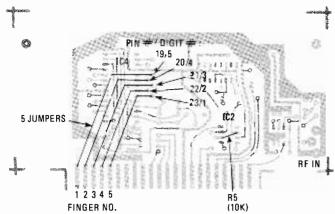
JUMPERS ARE NEEDED to complete the connections between several points on the foil side of the counter board. Use thin insulated wires for making the jumpers from pins 19–23 on IC4 to fingers 1–5 on the PC board edge.
